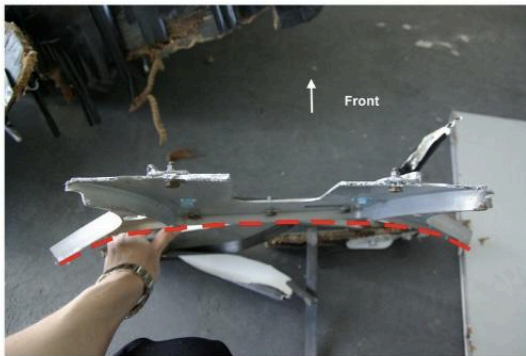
Luggage rack fitting deformed towards the front Toilet door (L54)
